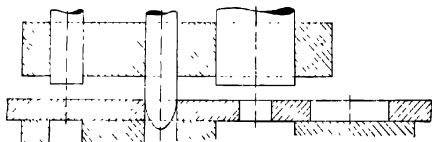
Pilot-pin method of centring pierced hole before blanking
